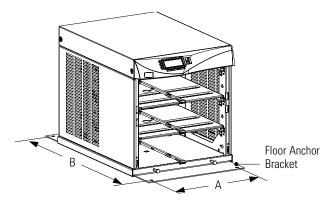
Floor Anchor Brackets Bolted to UPS Cabinet
